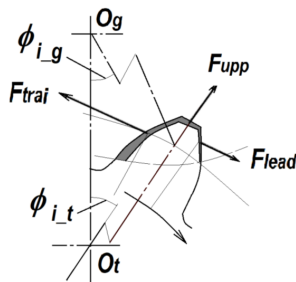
Friction forces acting on the face of the tool tooth near the cutting edges
